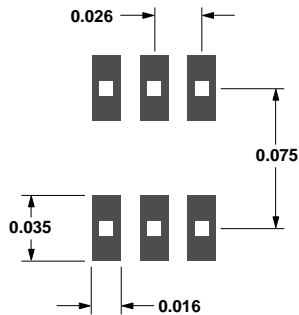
PCB Pad Layout, SOT-363. (dimensions in inches).
